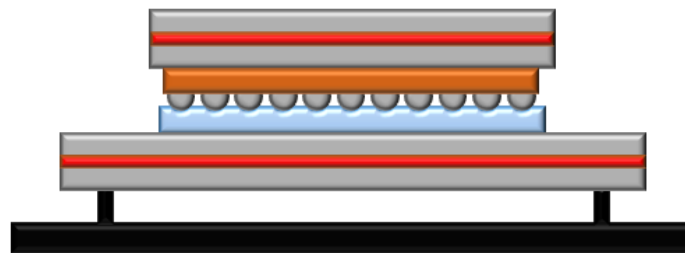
Drawcasting step one: pattern lowering and immersion
